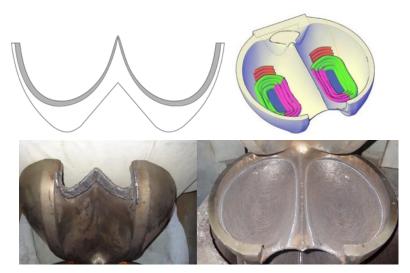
Weld filler process in a bucket on a Pelton runner.
